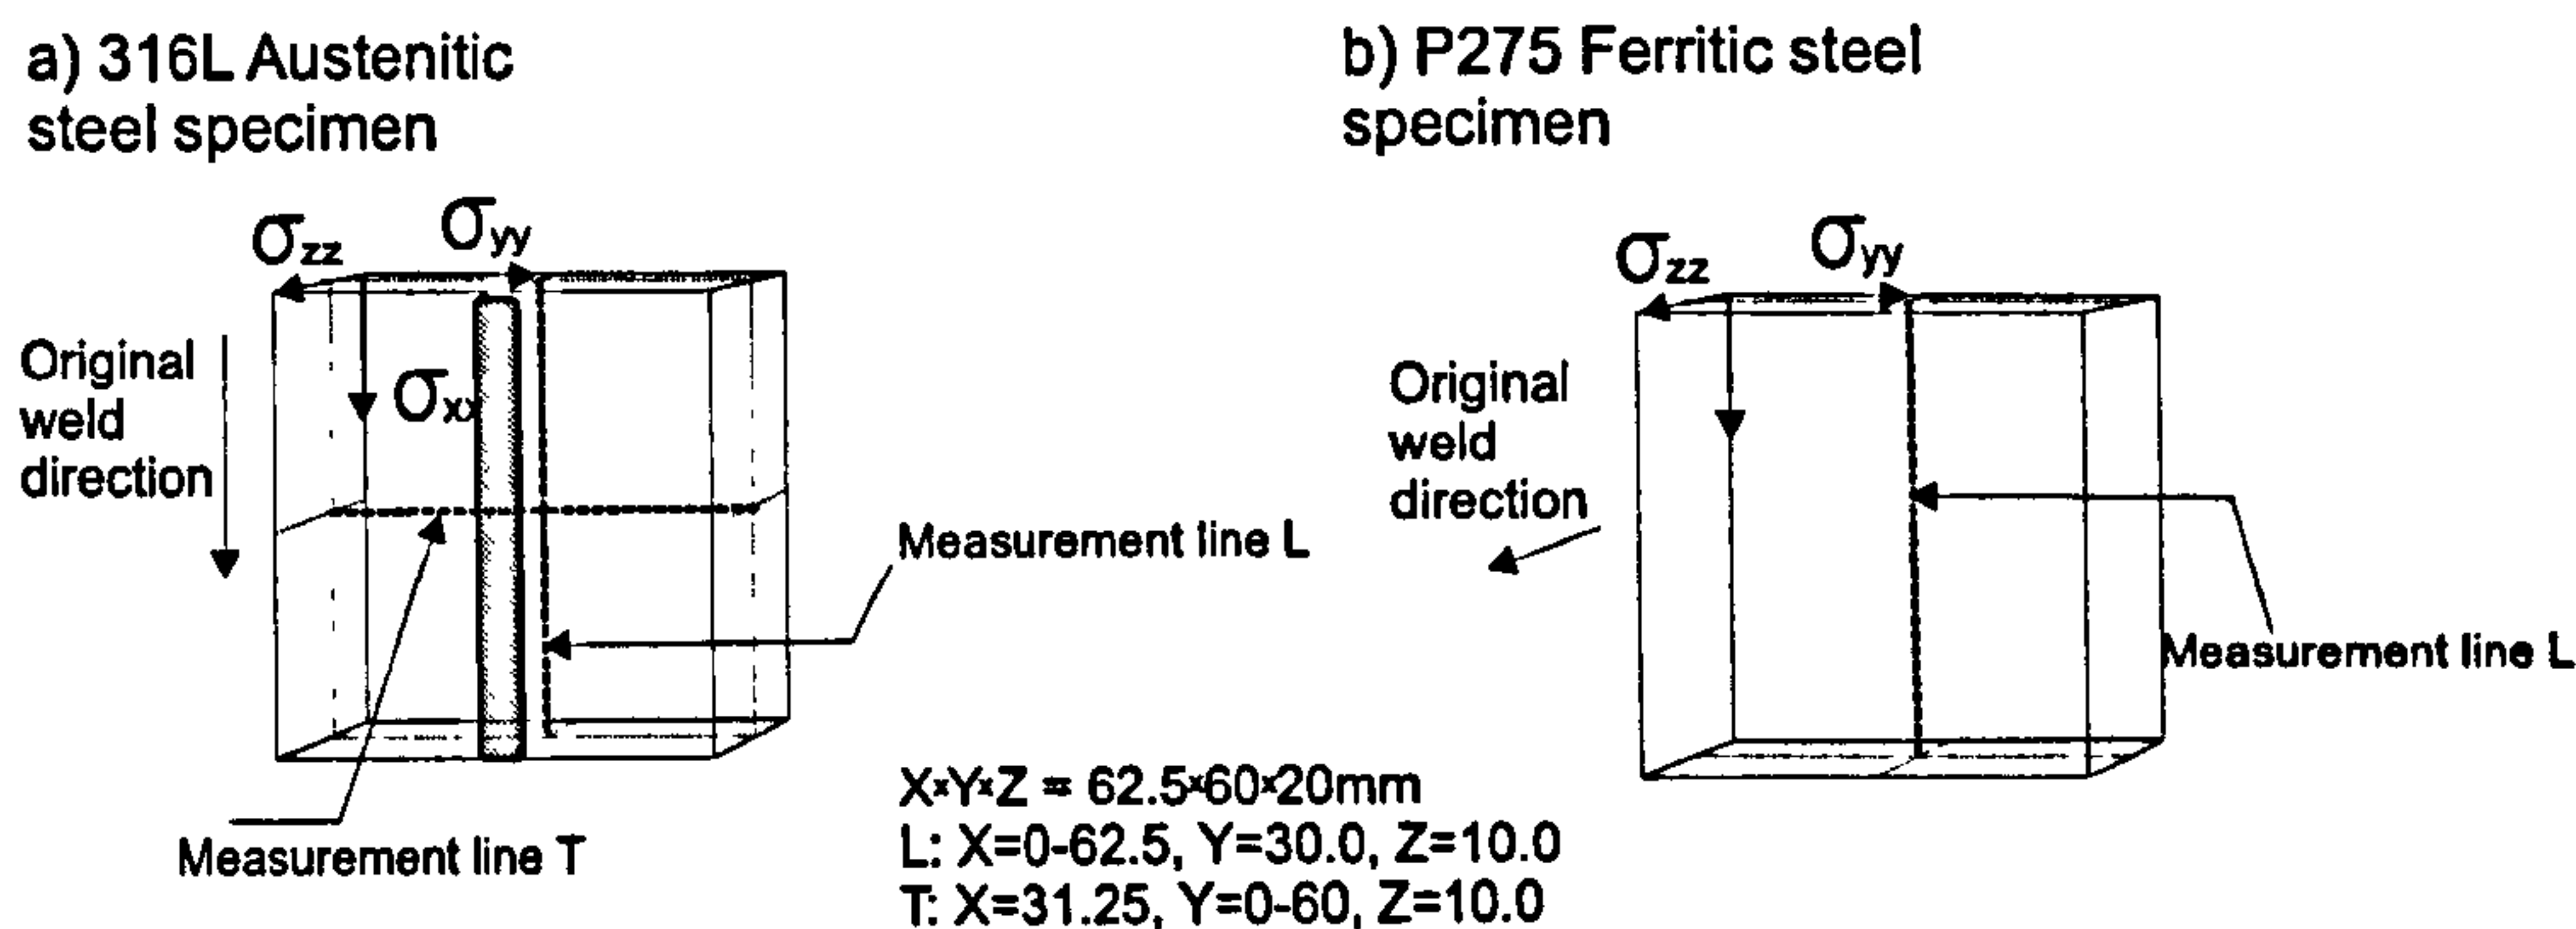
Positions of measurement lines in extracted specimens from a) 316L steel plate b) P275 steel plate.
